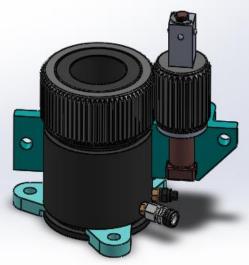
Hydraulic tool with clamp Figure 14: Hydraulic tool with counter gear
